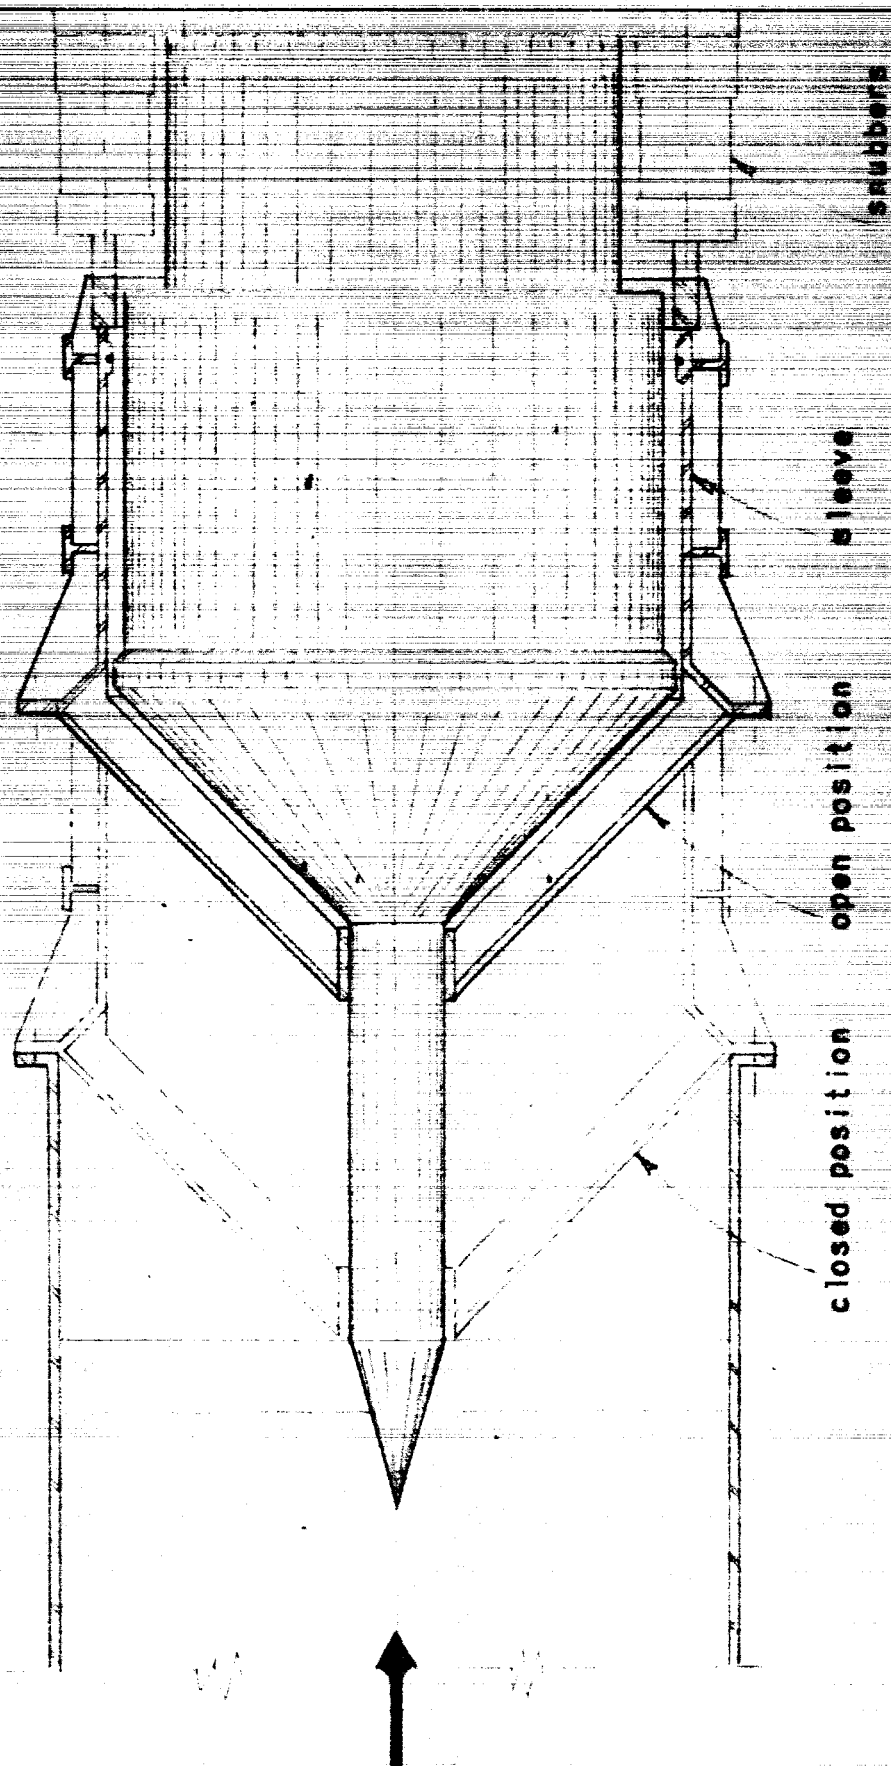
SLIDING SLEEVE VALVE CONCEPT
